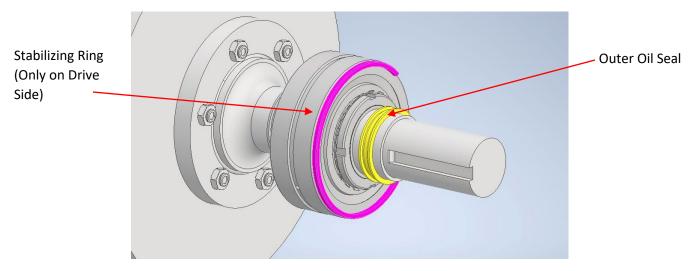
Bearing Oil Seal (Yellow) and Stabilizing Ring (Pink)
